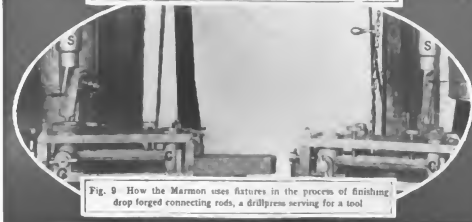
How the Marmon uses fixtures in the process of finishing drop forged connecting rods, a drillpress serving for a tool
